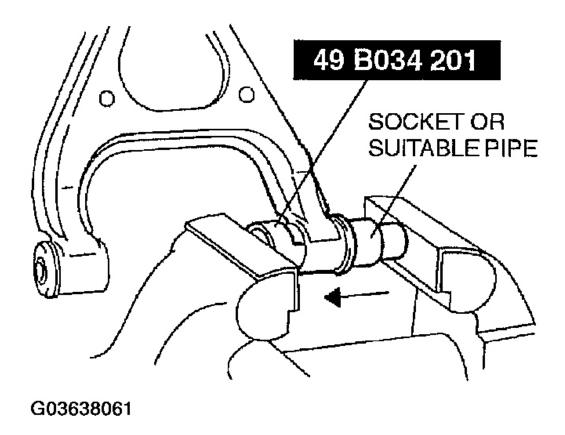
Pressing Upper Arm Bushing Out Using SST And A Socket Courtesy of MAZDA MOTORS CORP.
